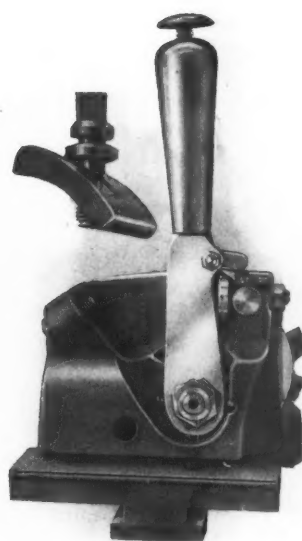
View of Tool showing Adjustment for Depth of Cut
